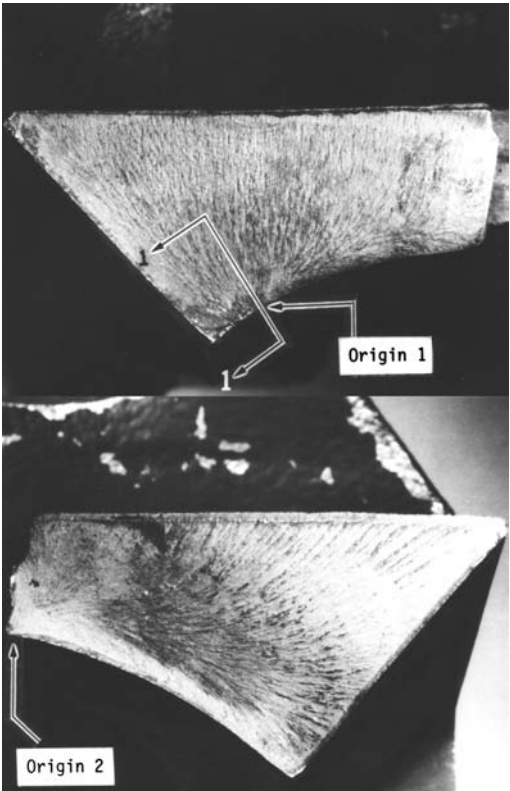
Fracture surfaces of the jack pad showing location of the origins. Original magnification: 2 ×
